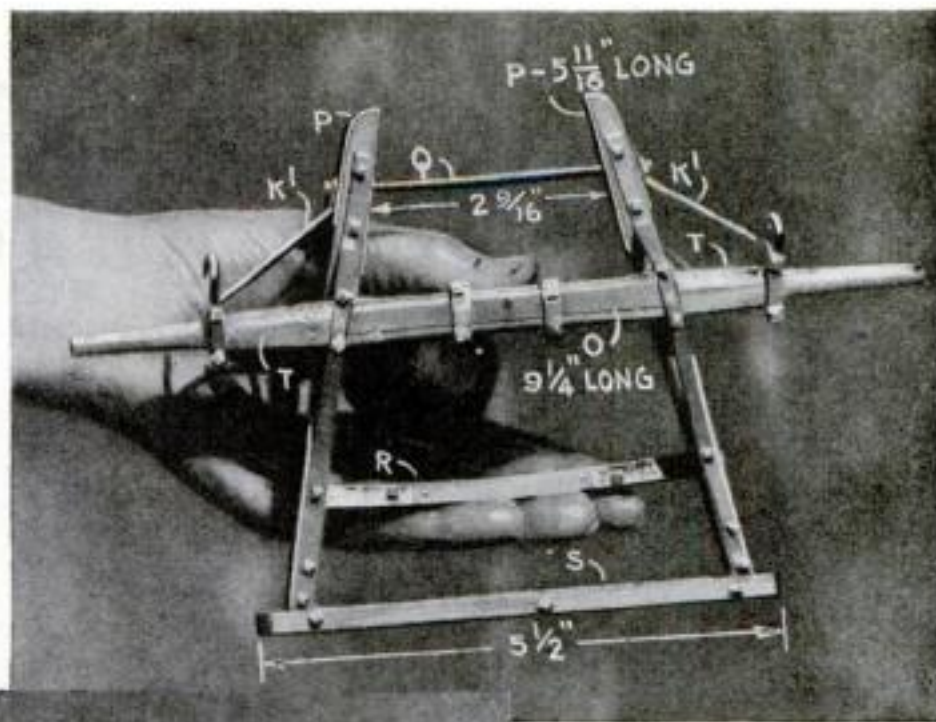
Bottom view of the same assembly shown in Fig. 6. The bottom of front axle *O* is shown.
